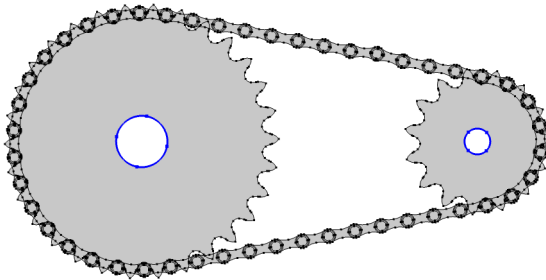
The Sprocket Inner Boundaries selection for creating attachments and hinge joints to mount the sprockets onto shafts.
